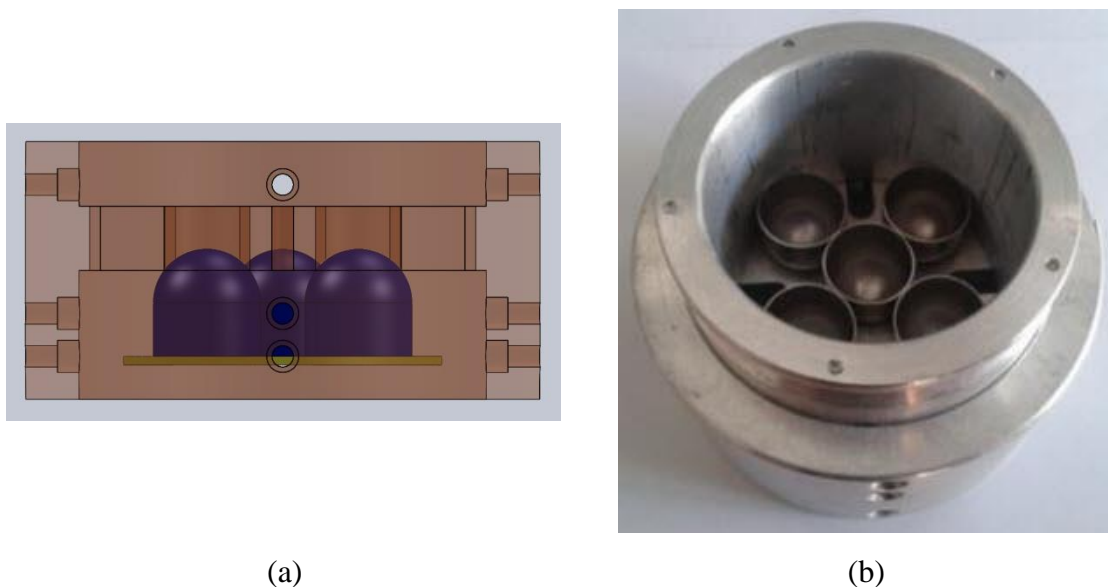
Bonding pattern for manufacturing of sandwich structures; (a) solid model, and (b) manufactured pattern.
